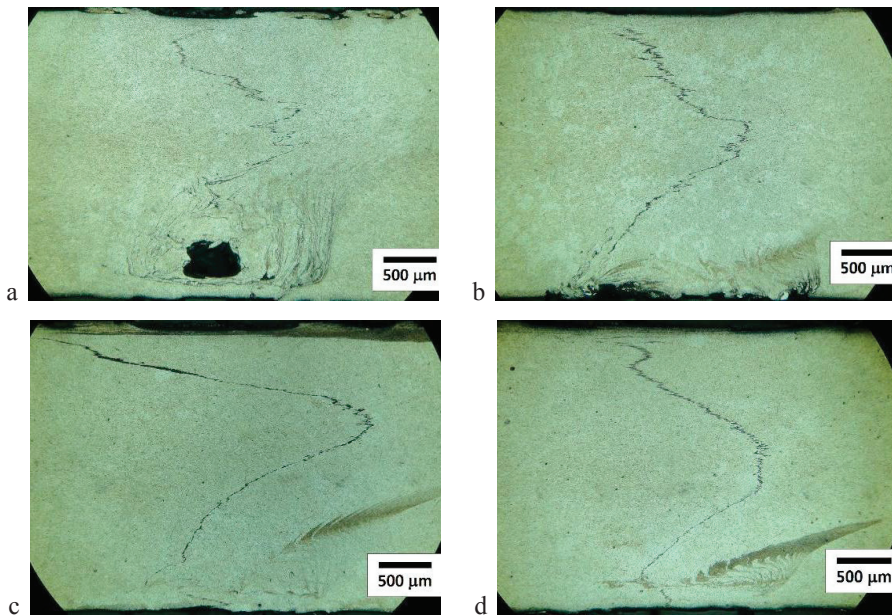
Welding nugget detail of FSW welded specimens: (a) D10; (b) D12; (c) D14; (d) D16.
